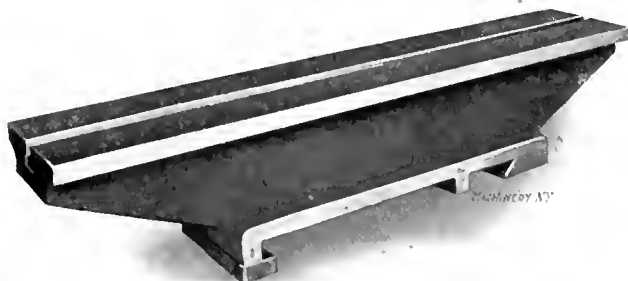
Auxiliary Table used for Work which would Overhang the Regular Table
